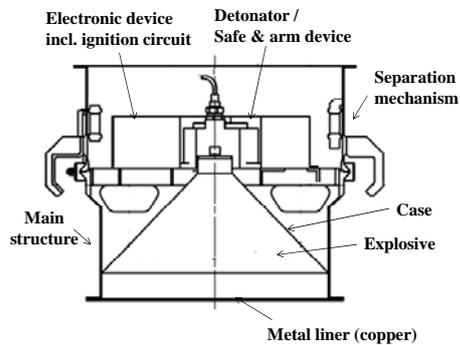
SCI configuration. The shape of the explosive part is circular cone.
